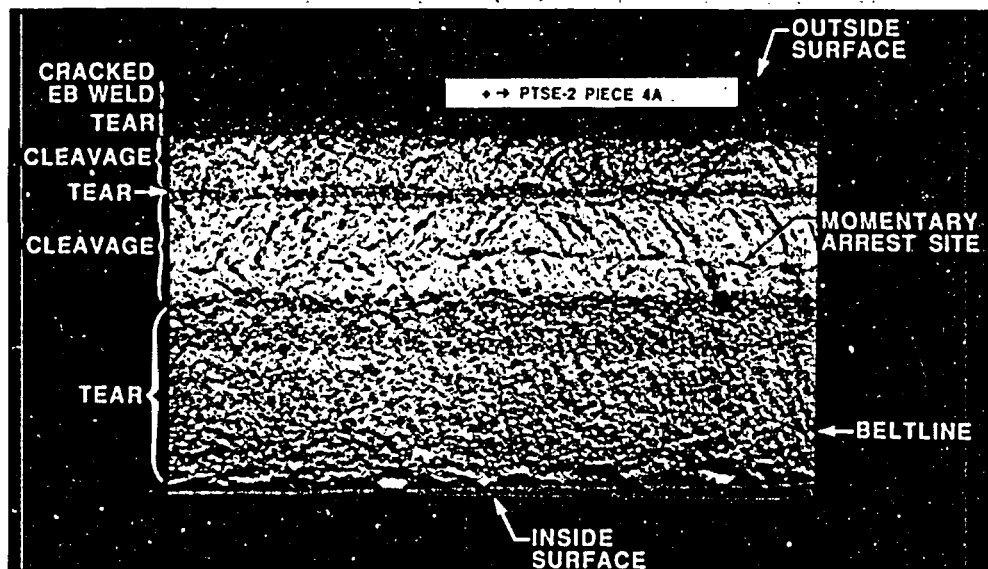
Fracture surface from the PTSE-2 test on a vessel with a LUS insert, showing a 50% increase in crack depth due to ductile tearing prior to the initiation of cleavage fracture.
